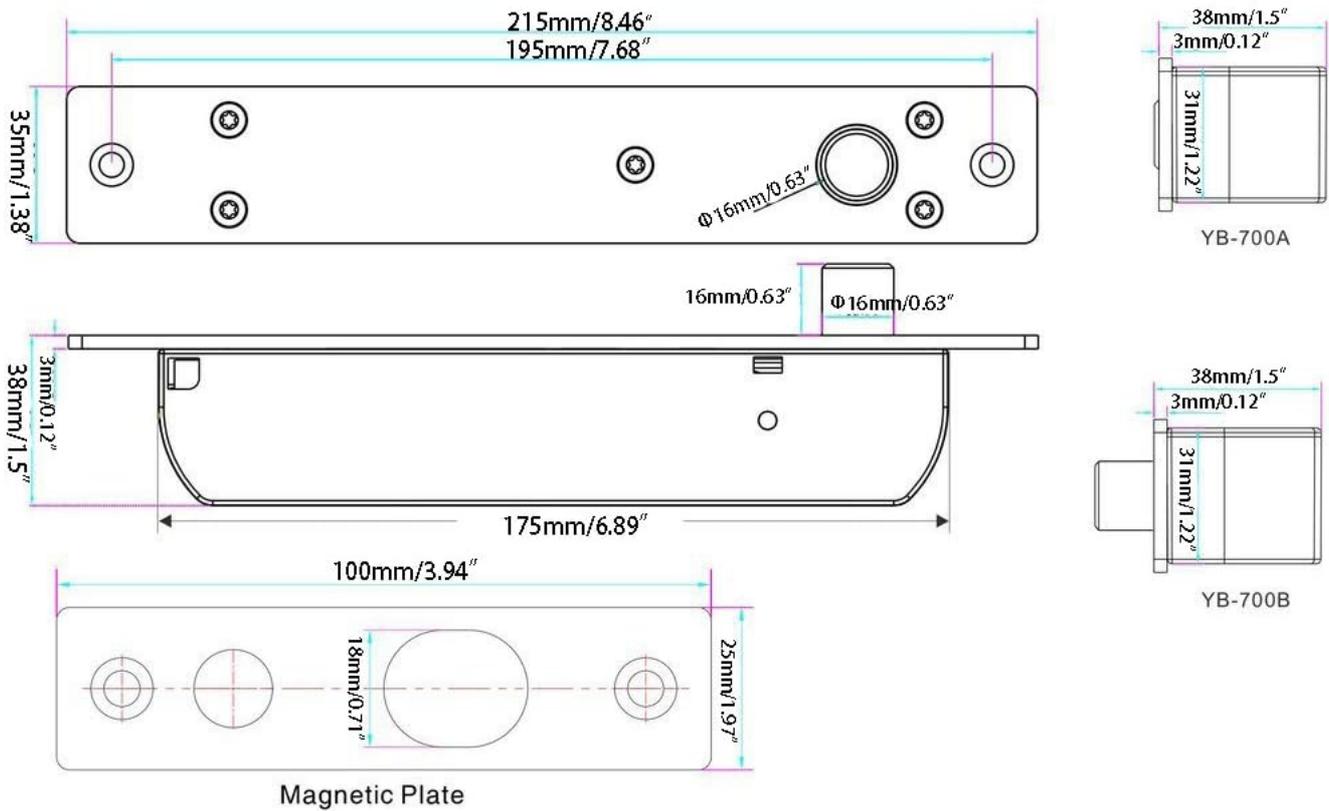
Detailed dimensions of the UHPPOTE YB-700A Electric Strike Lock and its magnetic plate, shown in both millimeters and inches.
